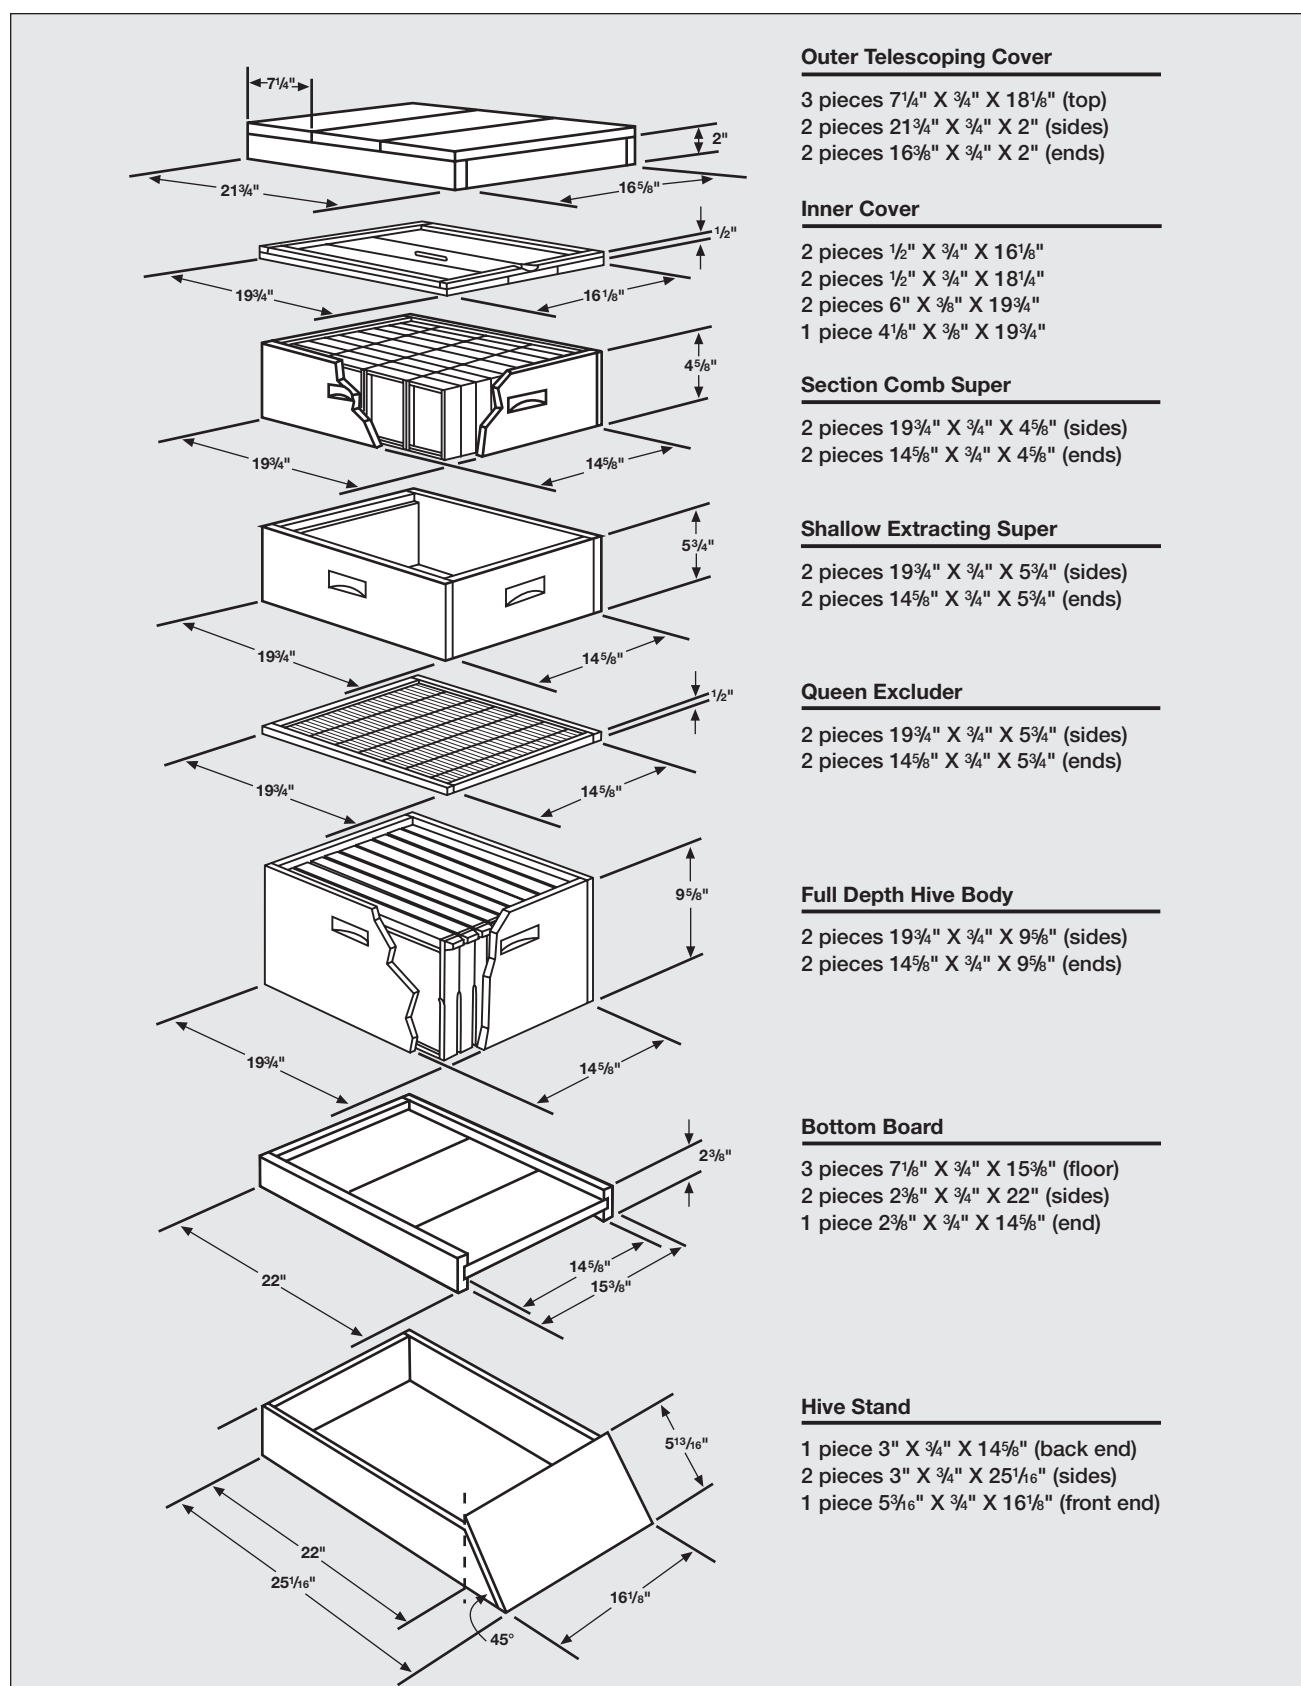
Equipment and dimensions for a standard Langstroth hive.
